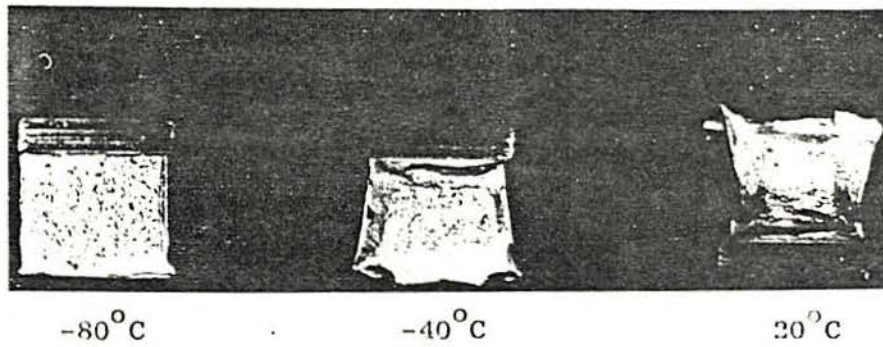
Examples of Fracture Surface Degree of Crystallinity for Charpy Specimens Tested at 20, -40 and -80 °C. X 2.
